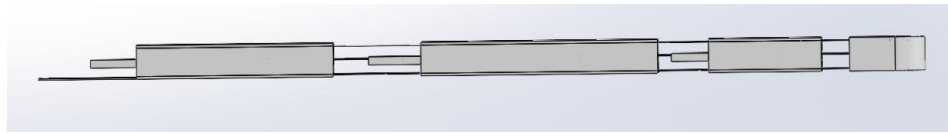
CAD Model of Independent Finger Mechanism (Right View)
